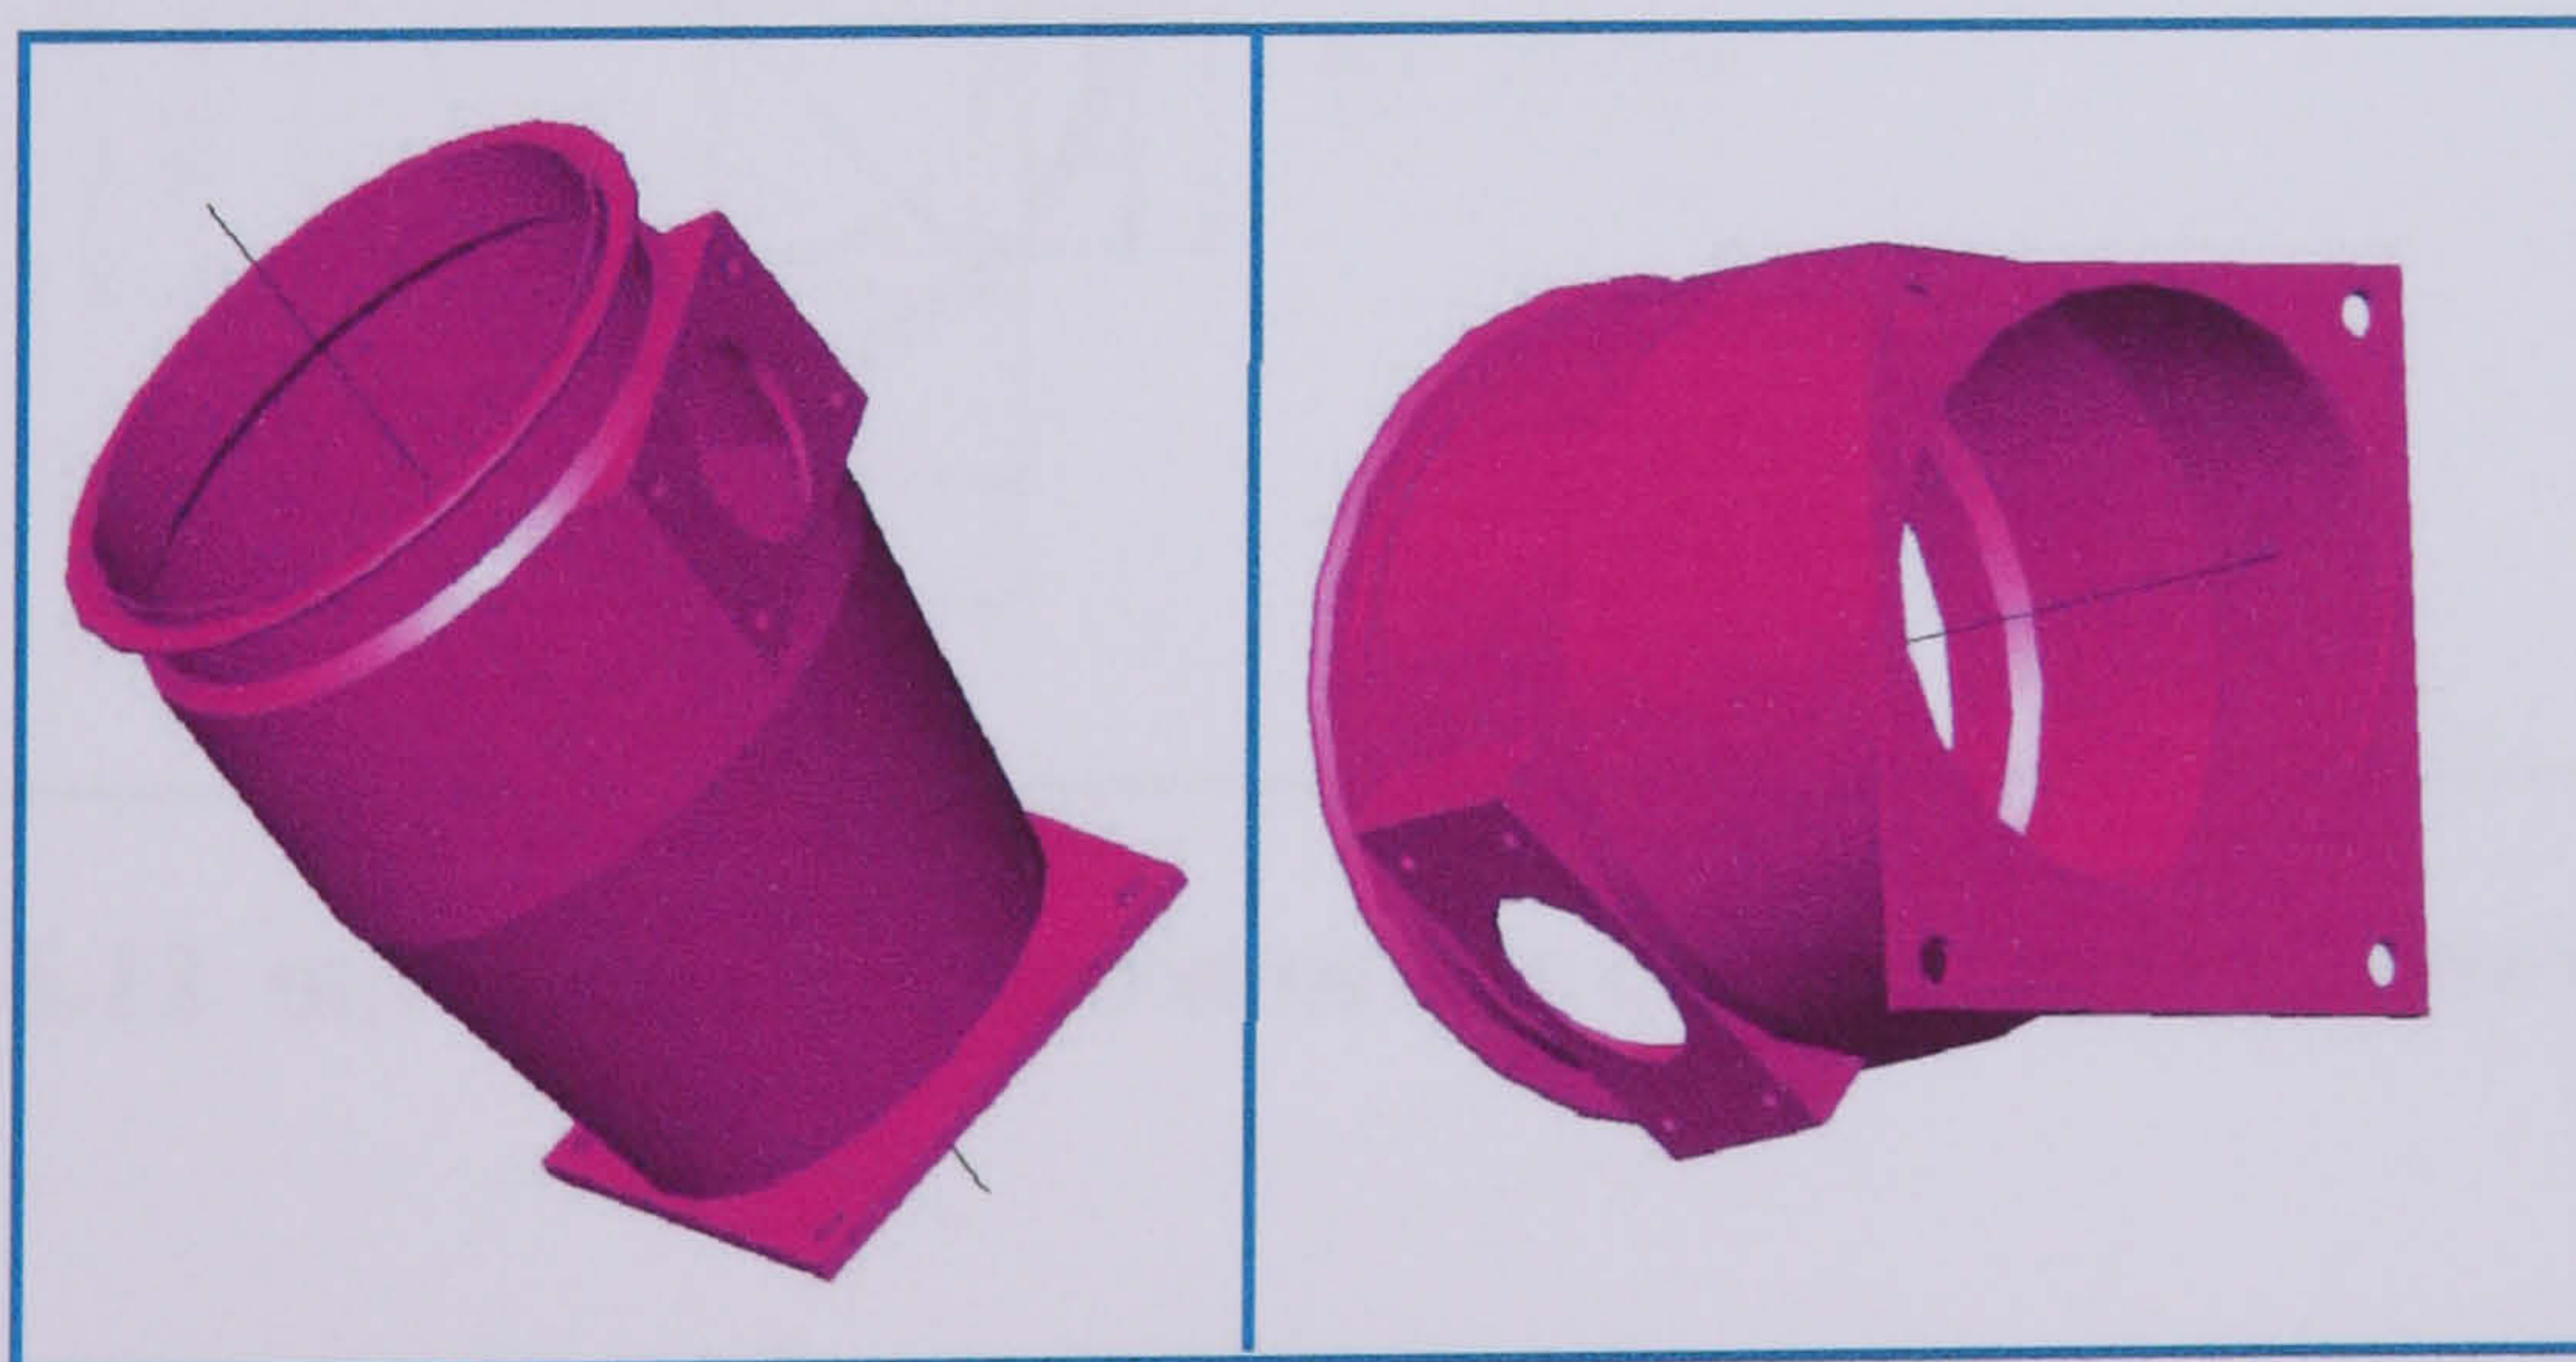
THREE DIMENSIONAL SOLID MODEL OF COMBUSTOR CASING
